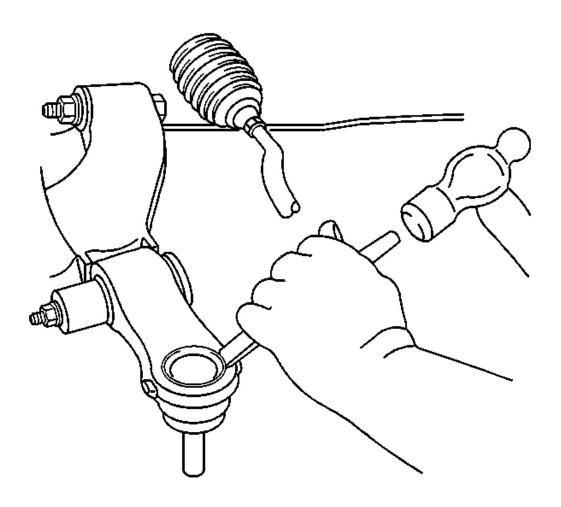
Removing Lower Ball Joint Flange Courtesy of GENERAL MOTORS CORP.
